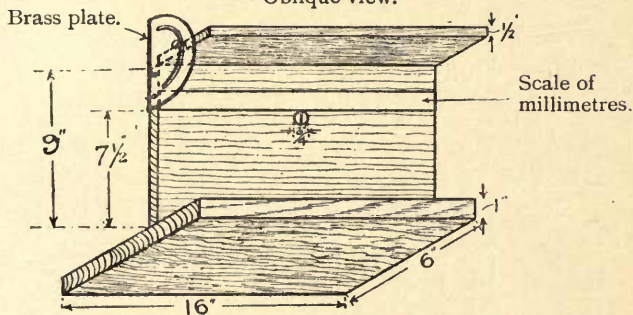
SCALE-BOARD FOR USE WITH REFLECTING GALVANOMETER.
